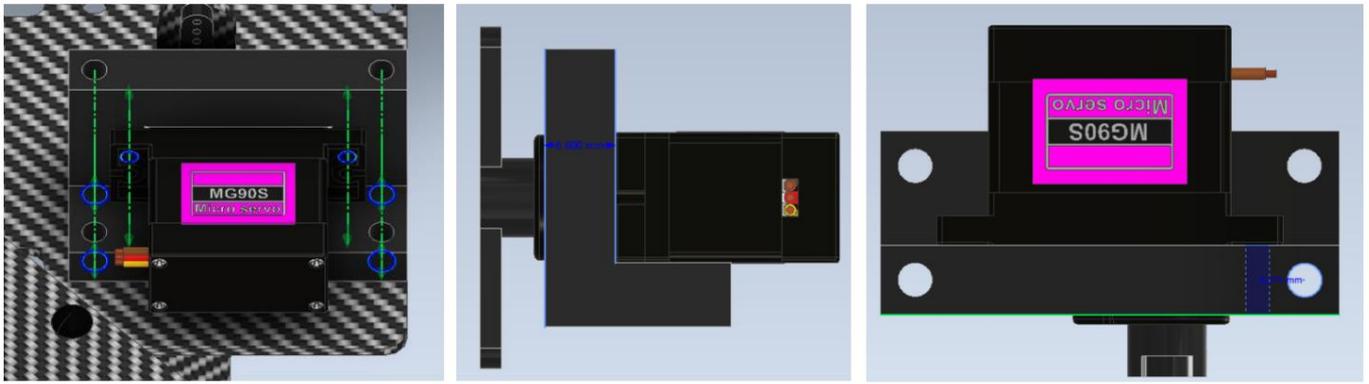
Function of the locking hole in the 90s fixing bracket; Figure 2-16 L-shaped thickness 6.6mm; Figure 2-18 Lock hole spacing 4.375mm.
